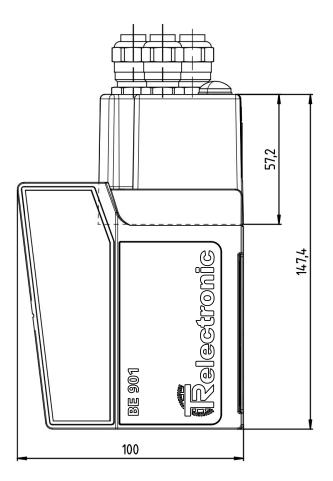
Dimension drawing BE 901 SSI with BE 901 MK SSI connection hood (all dimensions in mm)
